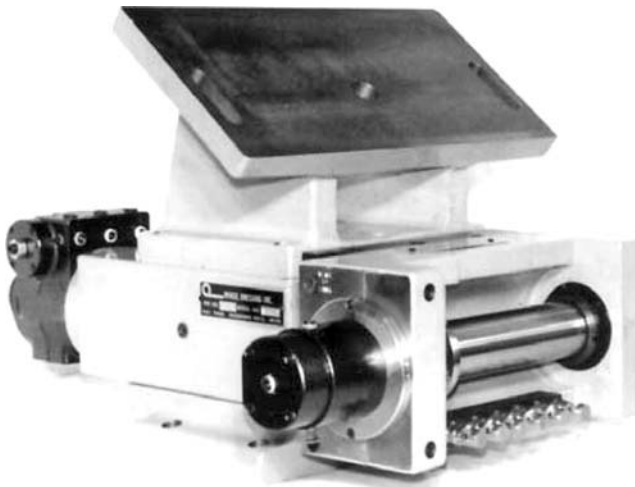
Hydraulic-mechanical compensator infeed system.
